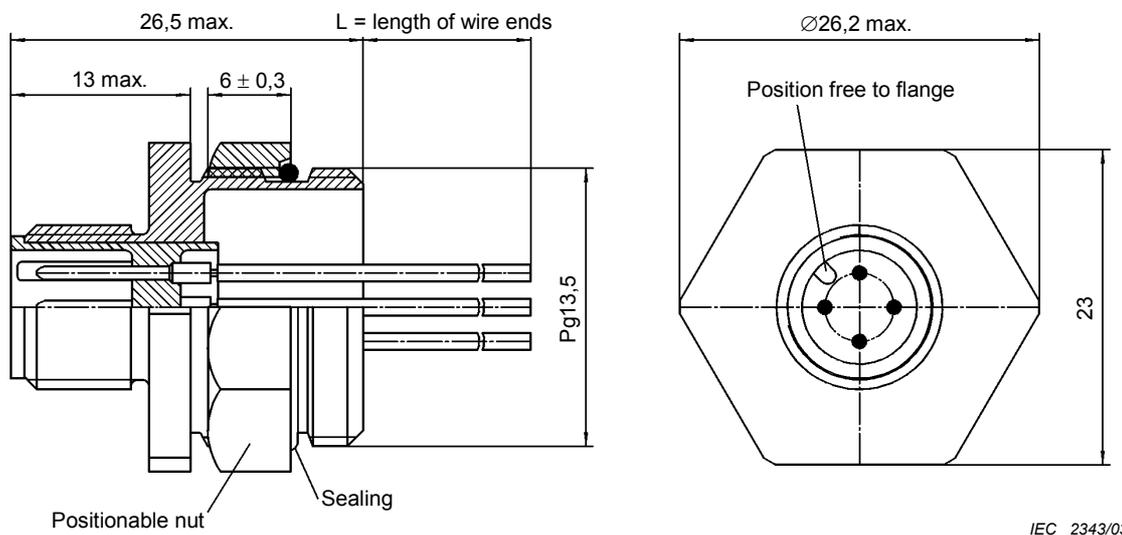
Fixed connector, with wire ends, single hole rear mounting Pg13,5, keyway orientation, male contacts
